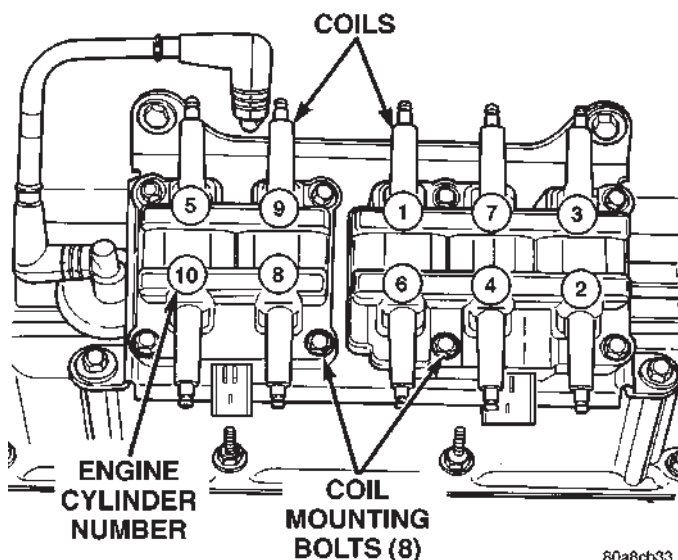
Ignition Coil Packs—8.0L V-10 Engine
